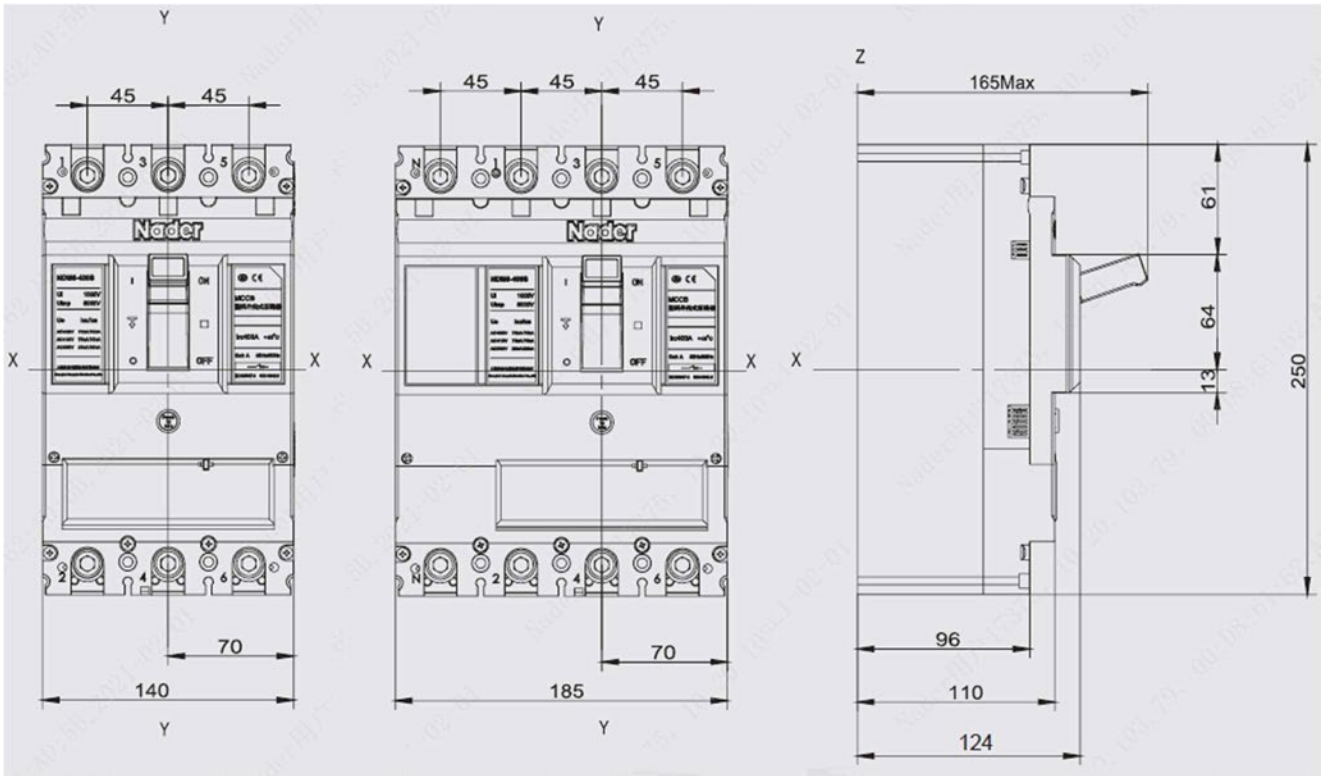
NDM5-250L/M/H 2P 3P 4P Outline dimension drawing of front board wiring products
